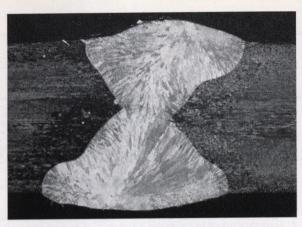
Inert-gas-shielded metallic-arc (Aircomatic) weld in 3/4-inch thick aluminum plate made in two passes.
